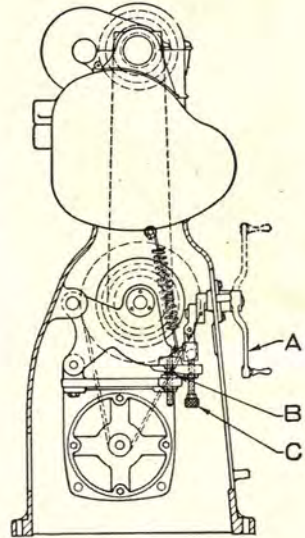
Underneath Motor Drive Arrangement for 10" and Larger Floor Type Lathes
